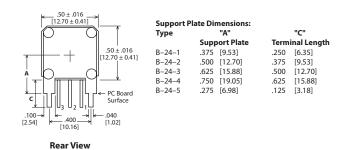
B24-12: Concentric Shafts, B24, 2 Potentiometer(s) or RS + PP, 3/8" Bushing
